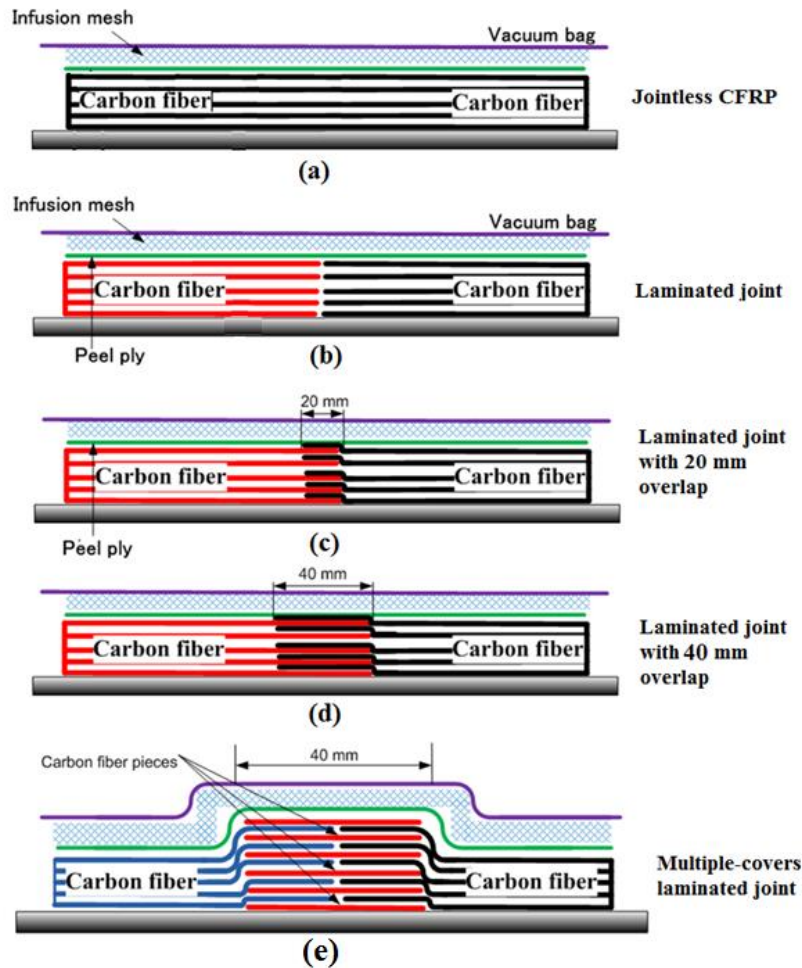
(a) Jointless CFRP, (b) Laminated joint, (c) Laminated joint with 20 mm overlap, (d) Laminated joint with 40 mm overlap, (e) Multiple-covers laminated joint
